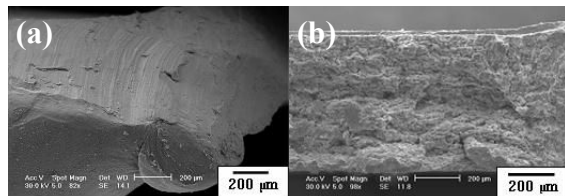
The fracture surface of spacer grid.: (a) 21GWd/tU burn-up, (b) 44GWd/tU burn-up
